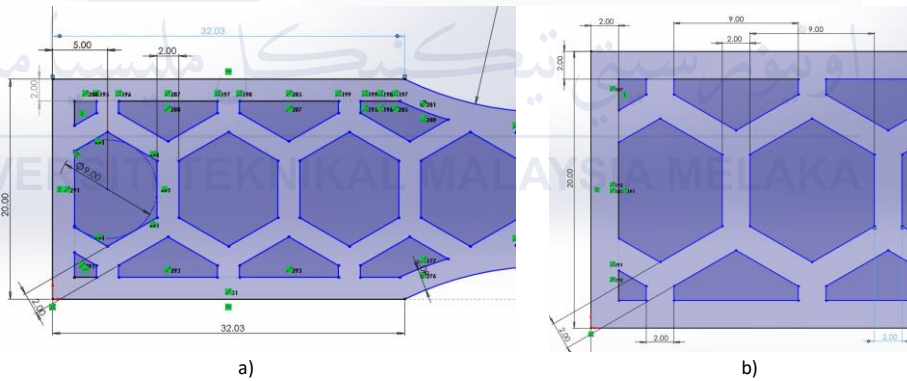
Dimensions of 2D sketch honeycomb structure for (a) tensile sample and (b) flexural sample
